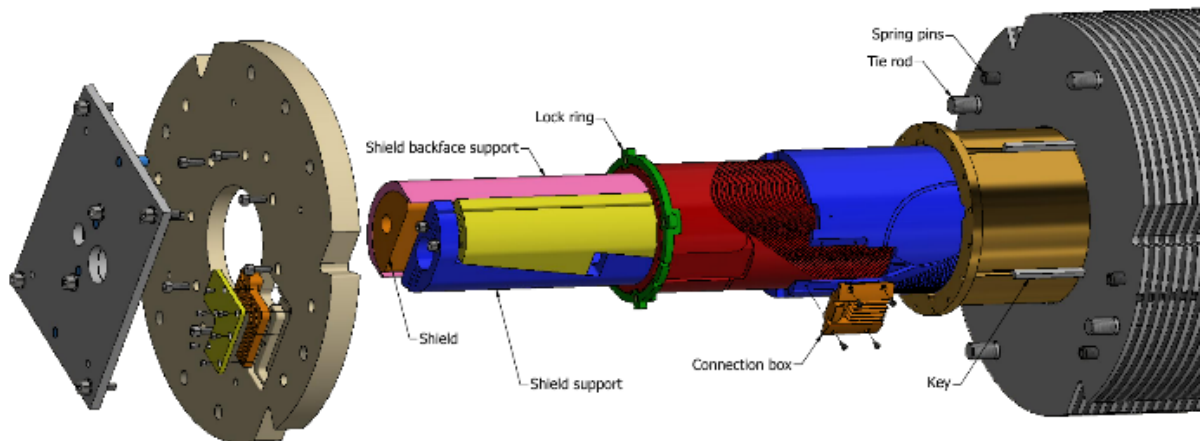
Exploded view of the SuShi septum magnet prototype and the superconducting shield.
